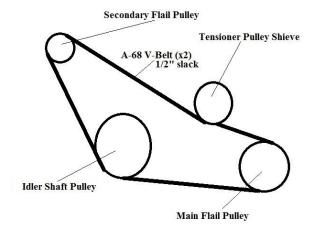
RH Side of Harvesting Unit Flail Belt and Pulley Identification
